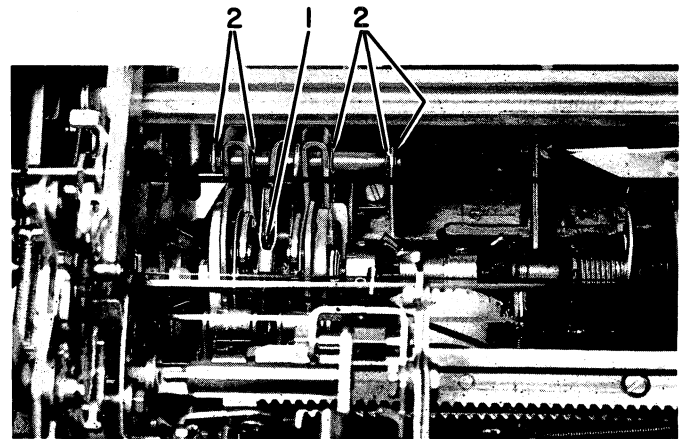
Operational Cam Check Pawl and Escapement Cam Follower Removal
